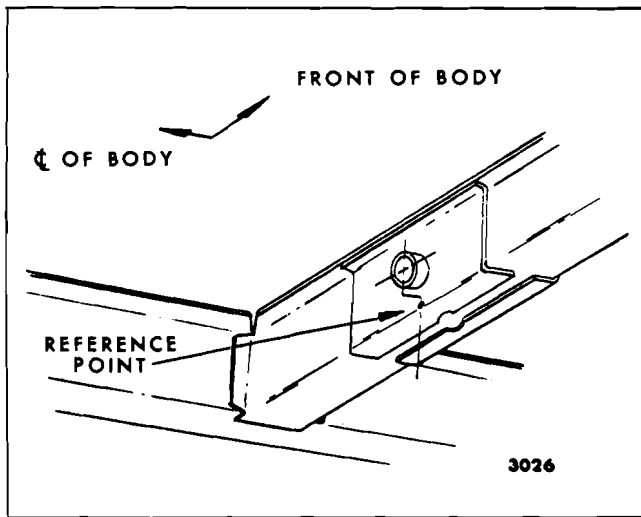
Side Rail at Rear Spring Rear Shackle Bushing
